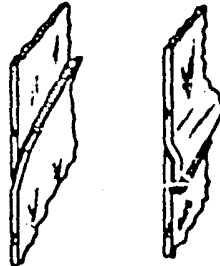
(Left) Overhand technique for welding in the horizontal position (right) Underhand technique for welding in the horizontal position
